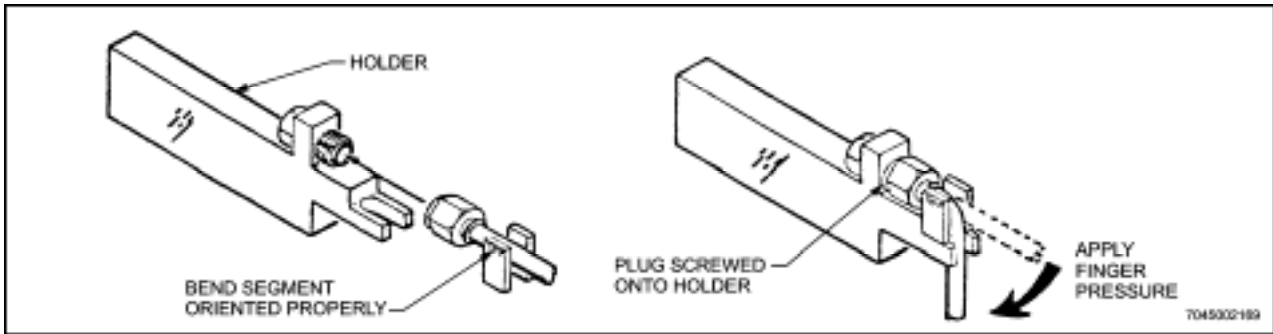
0.025 Inch Radius Bends on RG-402/U Cable and 0.125 Inch Radius Bends on RG-405/U Cable
